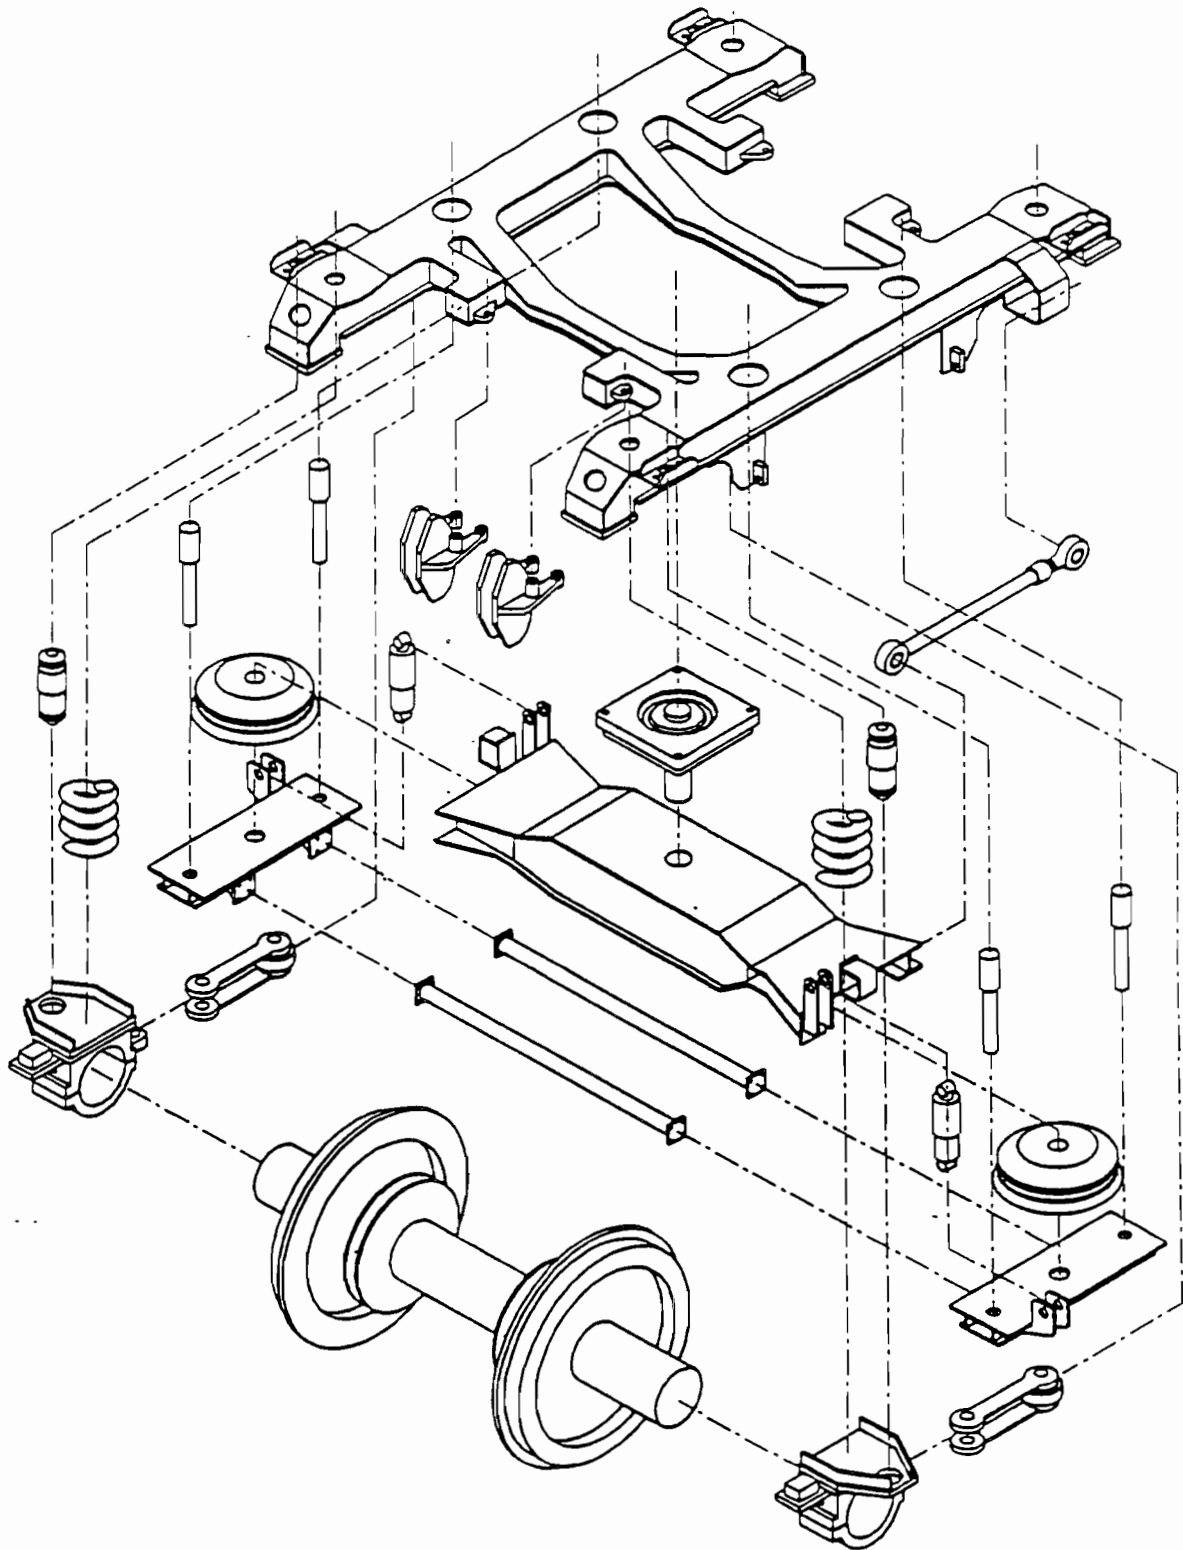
Waggon Union MD76 for Amtrak Superliner 1 - Exploded View
